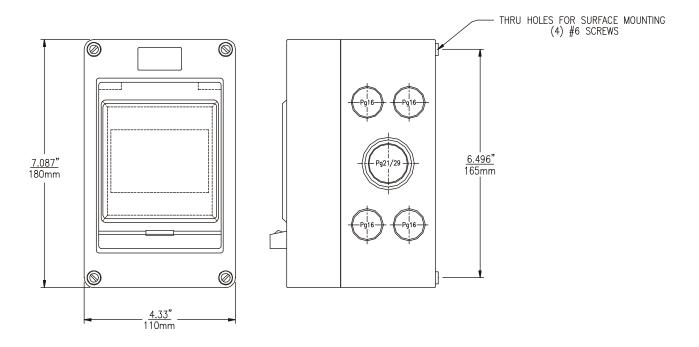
Single Module System Enclosure Dimensions (80-0005)
